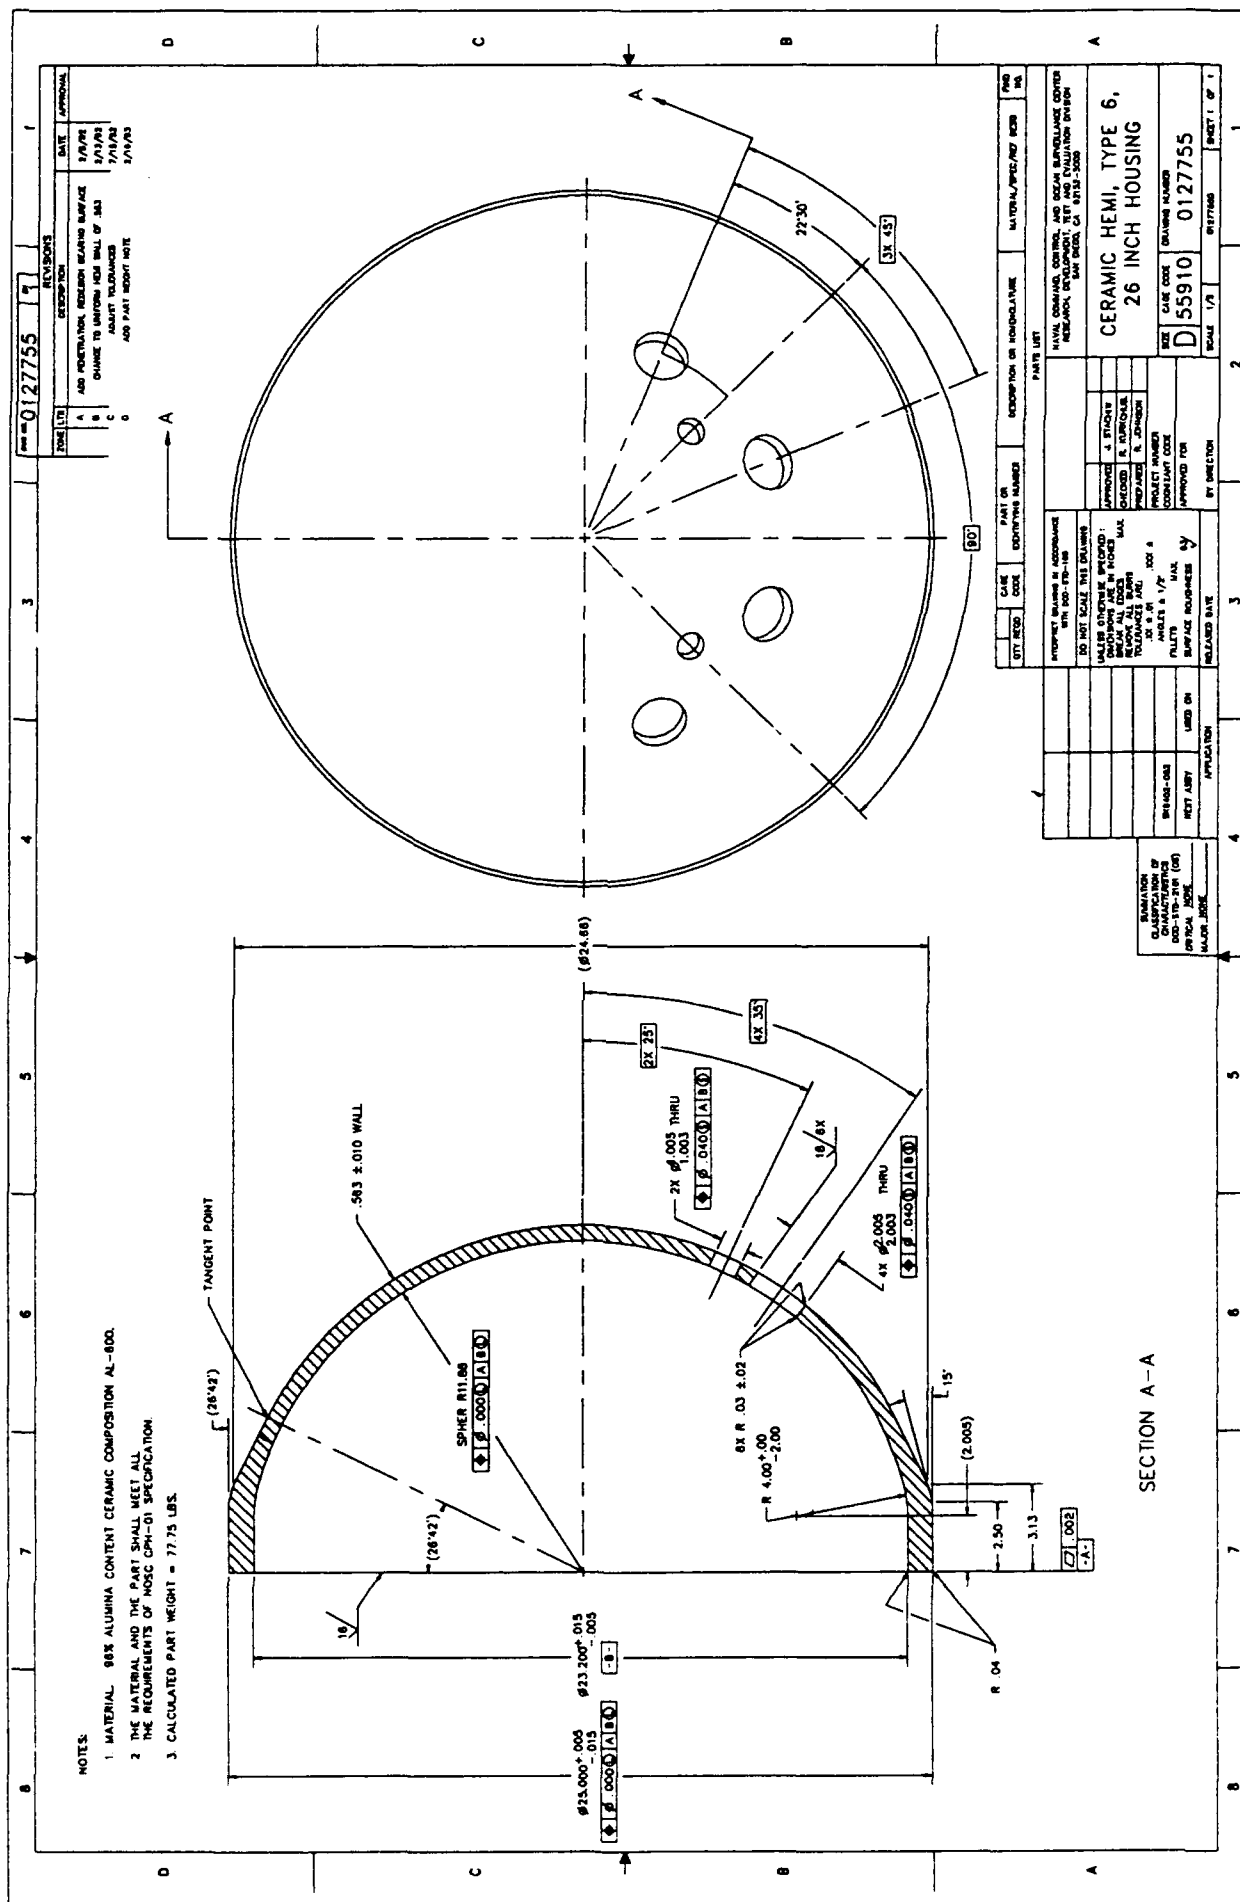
Engineering drawing of the 26-inch-housing alumina-ceramic Type 6 hemisphere.
